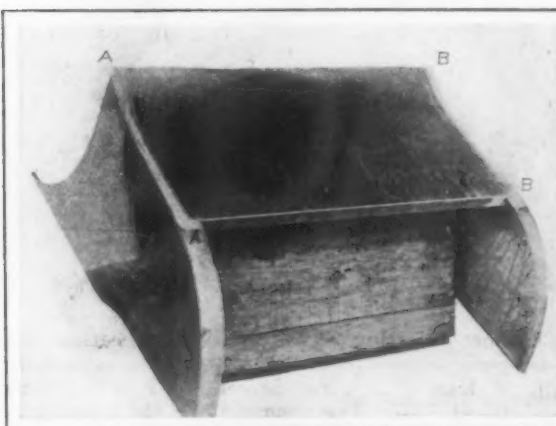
Rear Boot of Franklin Roadster Welded at A and B in 7 Min.
